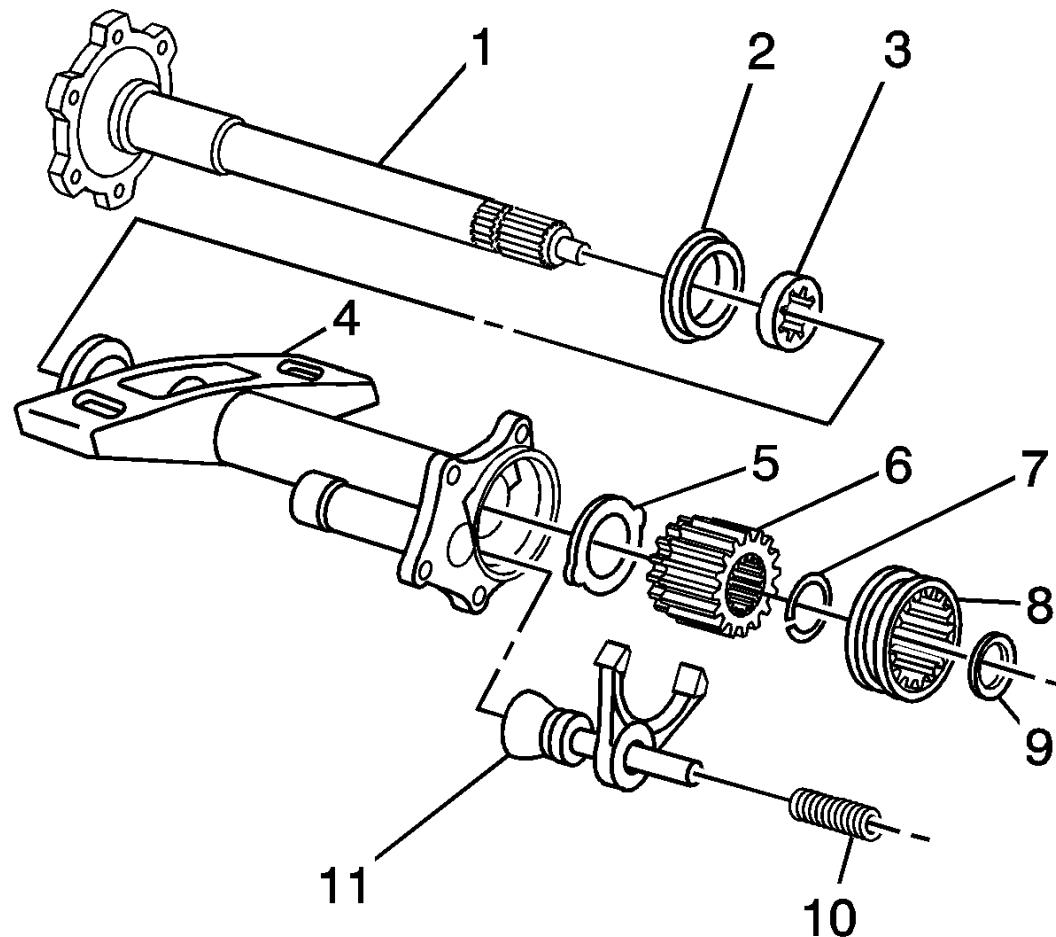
Inner Axle Shaft Housing Components (8.25 Inch)
